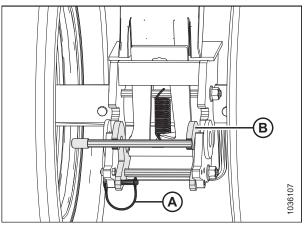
Left Transport Wheels – Rotation Lock Latch Engaged
